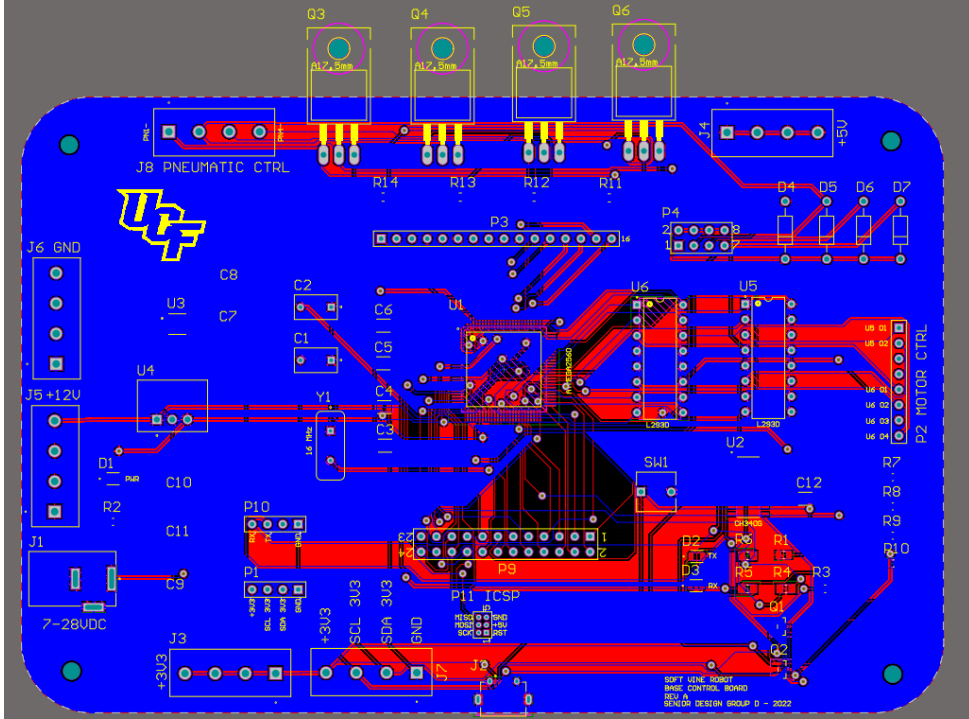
Base Control Board PCB Layout for Top (Red) and Bottom (Blue) Layers
